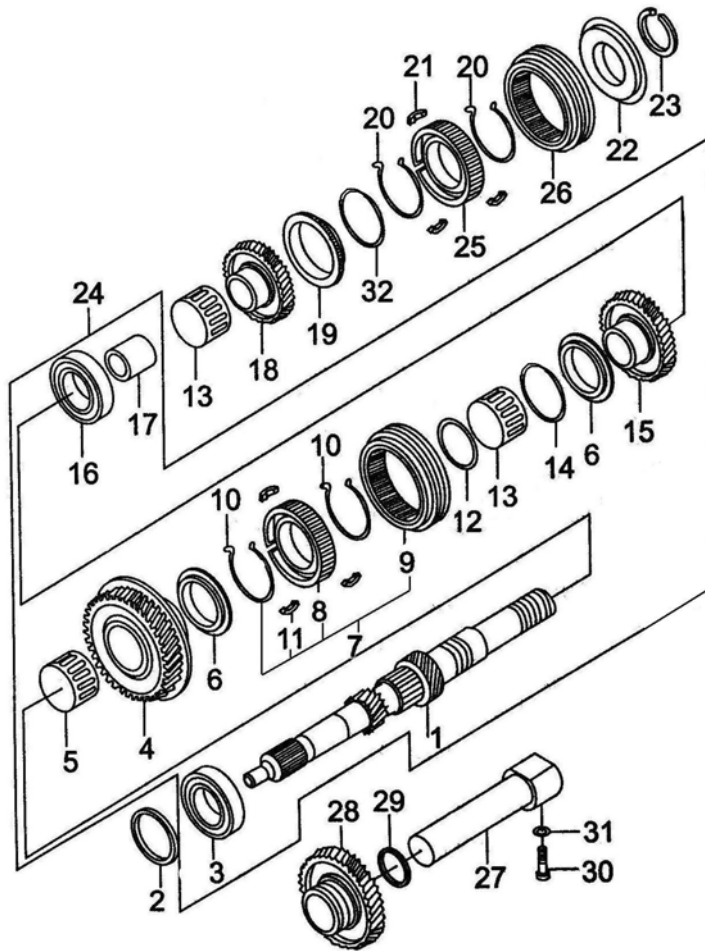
Transmission assembly(five gear) – input shaft and reserve shaft
